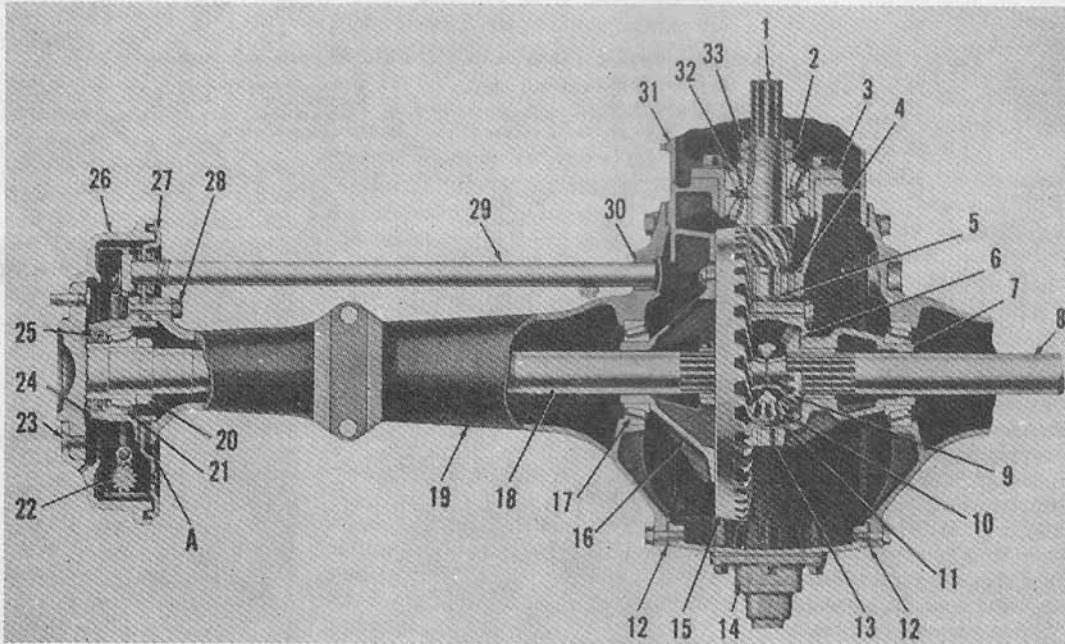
Model TO20 main drive bevel pinion and ring gear, differential unit and wheel axle shafts and housings assemblies. Bevel pinion (1) and ring gear (15) are available only as matched pairs. Model TE20 is similar except for the brakes, Fig. F45.
